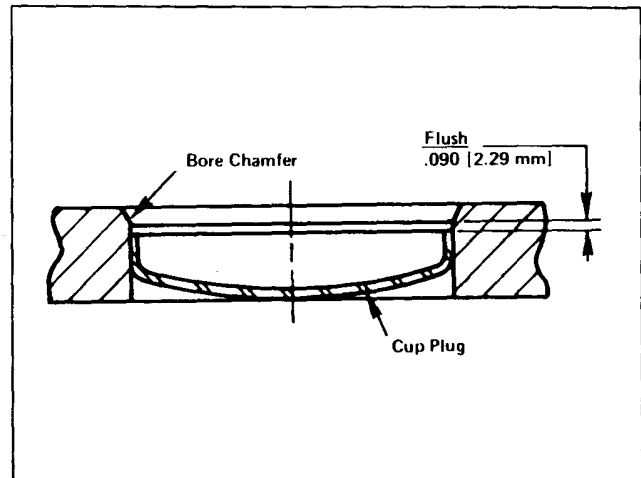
, (N102100). Cup plug installed in bore below chamfer
